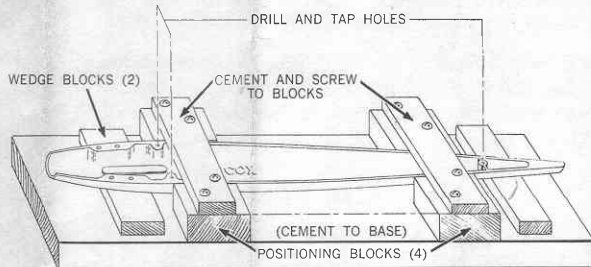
shows how to make a fixture to hold the pan in position while drilling the tie-down holes. A drill press should be used to assure correct alignment.
